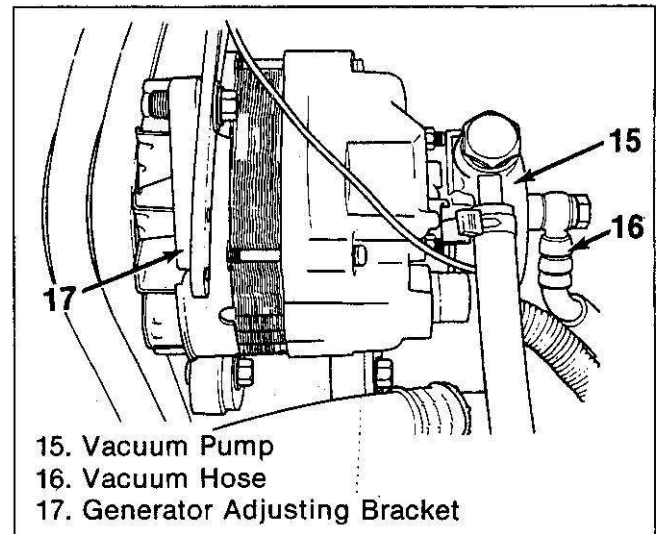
Vacuum Hose Attachment at Vacuum Pump
